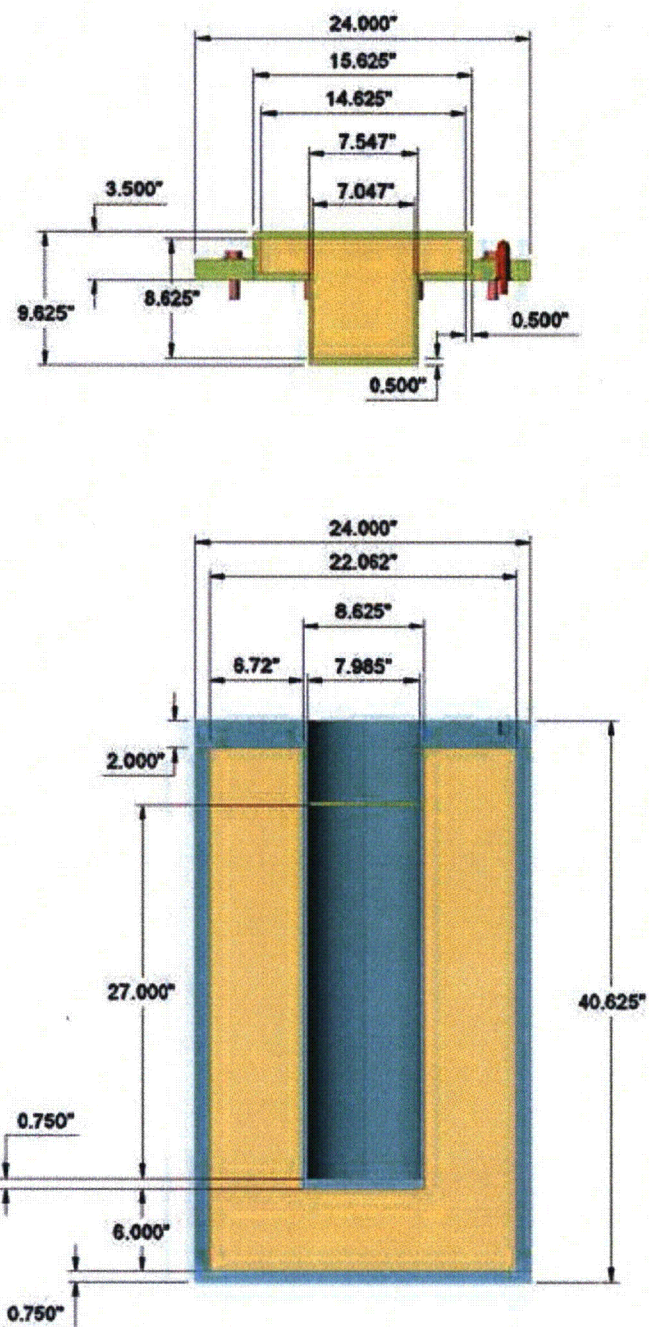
Elevation View of Shielding Model (NCT & HAC)
